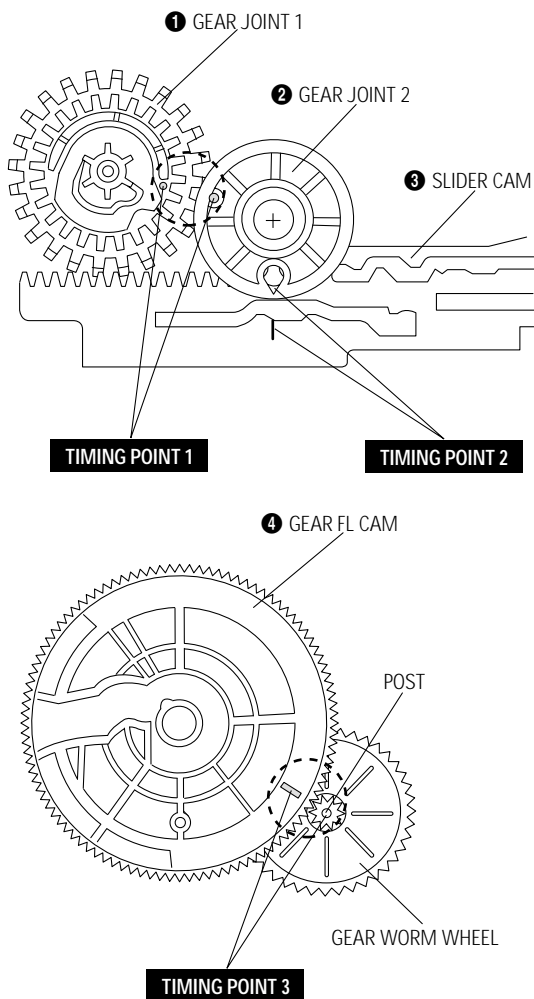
Assembly of Gear FL Cam, Gear Joint 1, 2
